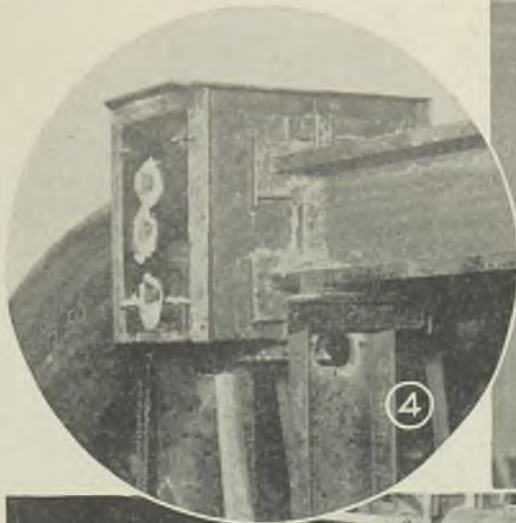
Two H-beam sections for a railroad car here are shown with the mold for the thermit weld in position. Twenty-eight welds were required for this car and permanent patterns therefore were used in place of the usual wax pattern
